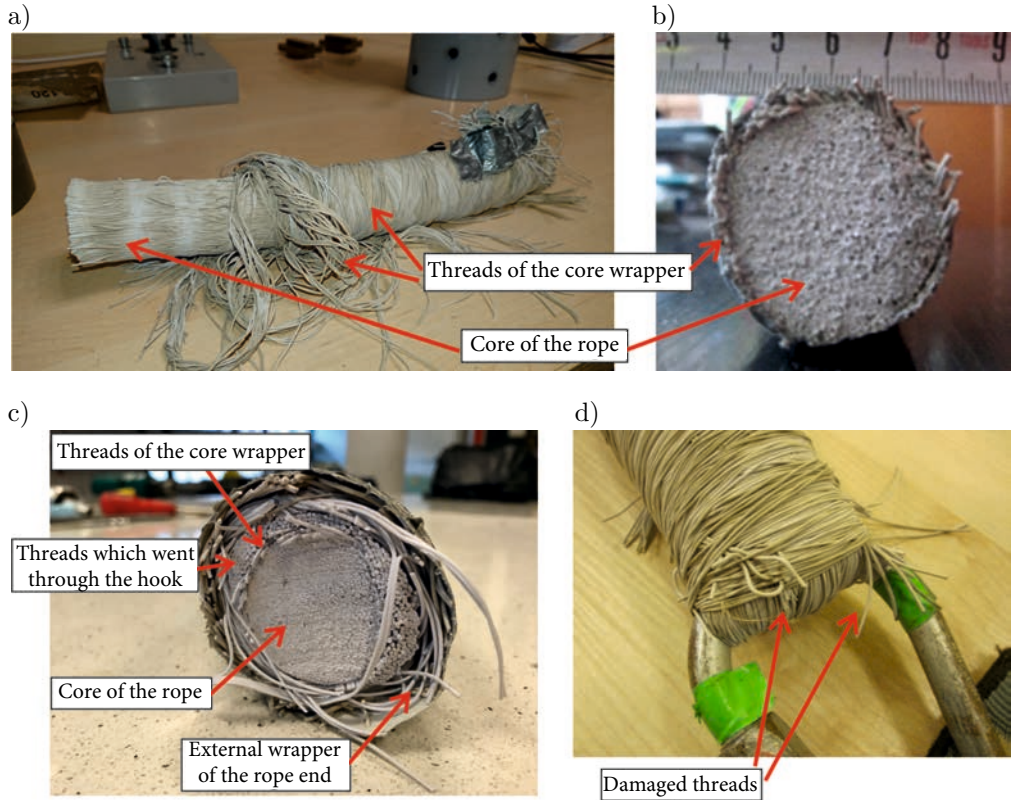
Rope construction: a) general view of rope fragment, b) cross-section of rope core (units [cm]), c) cross-section of rope end (crane side), d) rope fixation on a snap hook on the crane side.
